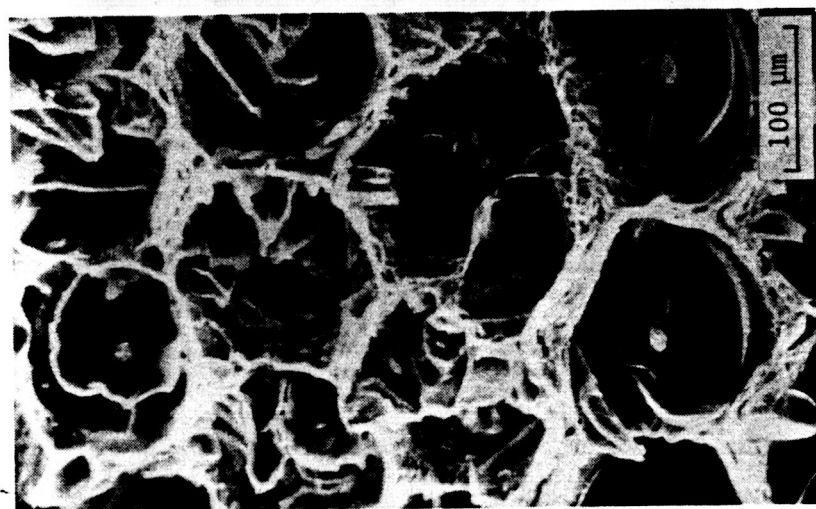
Fracture surfaces of continuously exposed B/Al.
